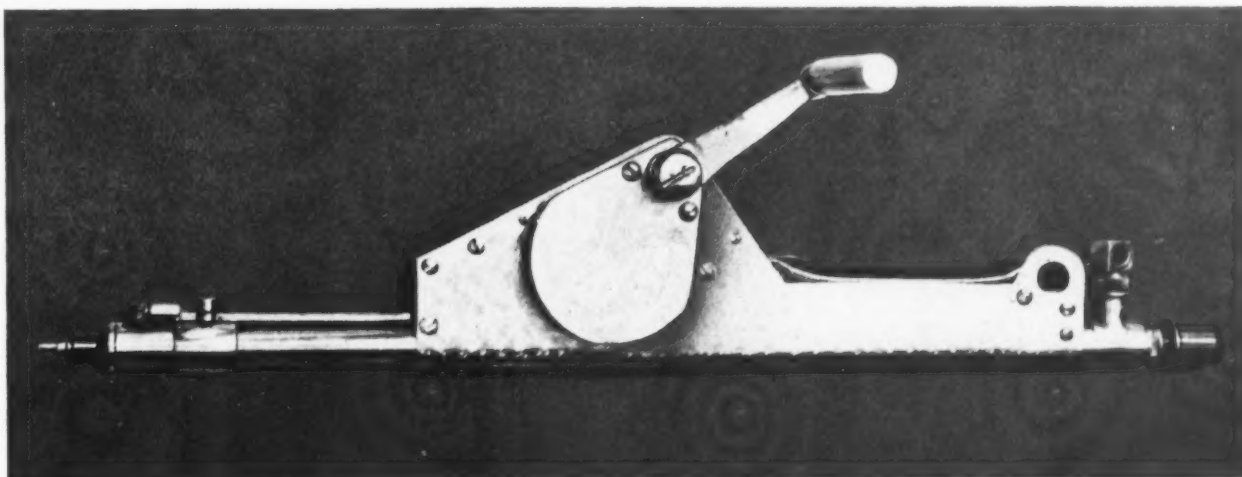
Chobert Crank-operated Riveting Machine Gun
